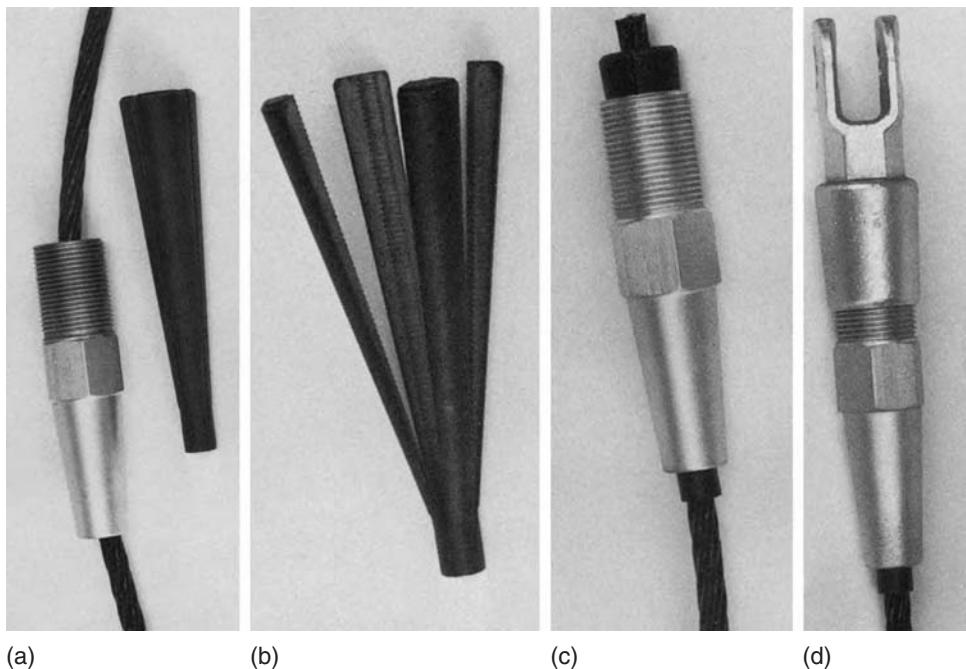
Mechanical termination with segmented collet to grip rope. (a) Socket and split sleeve before assembly. (b) Split sleeve opened. (c) Sleeve around rope inserted into socket. (d) End cap screwed on tightly to press sleeve into socket. Reproduced by courtesy of Electroline.
